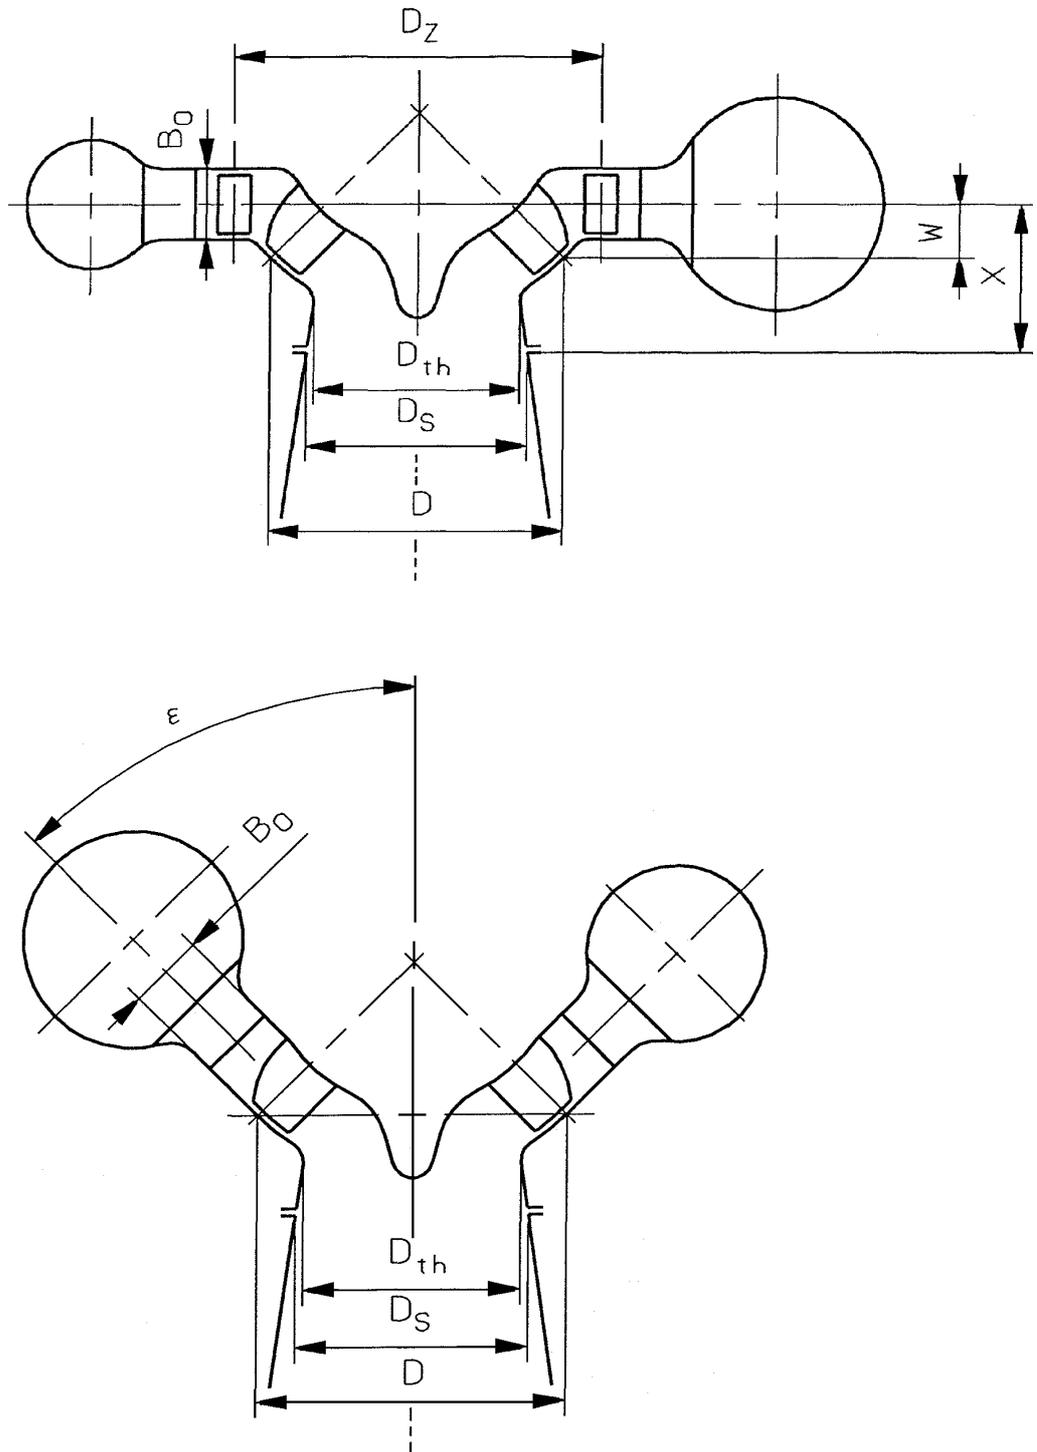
Diagonal machines with adjustable runner [impeller] blades
